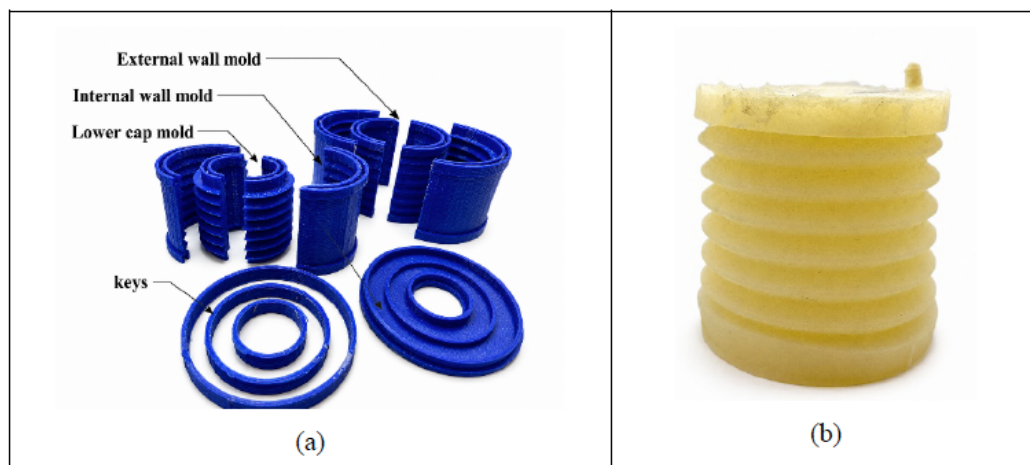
Fabrication by casting: (a) disassembled mold components used during the casting process, (b) cast prototype.
